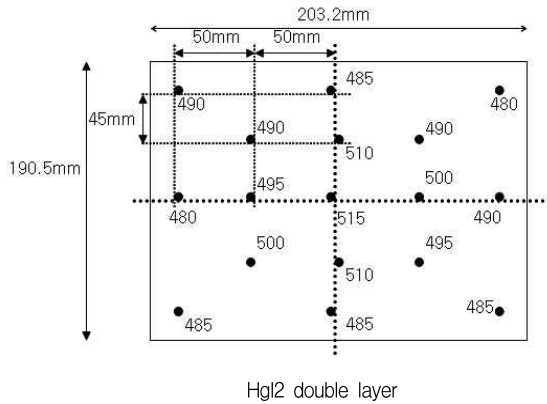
Measurement results of surface uniformity measurement with coating thickness gauge
